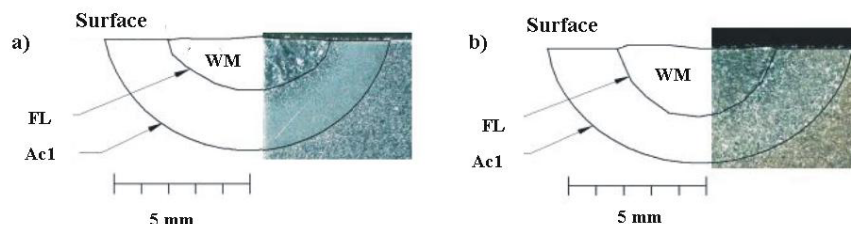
Single bead characteristics: left, P20 steel; right, VP50IM steel welded with dissimilar filler metal.
